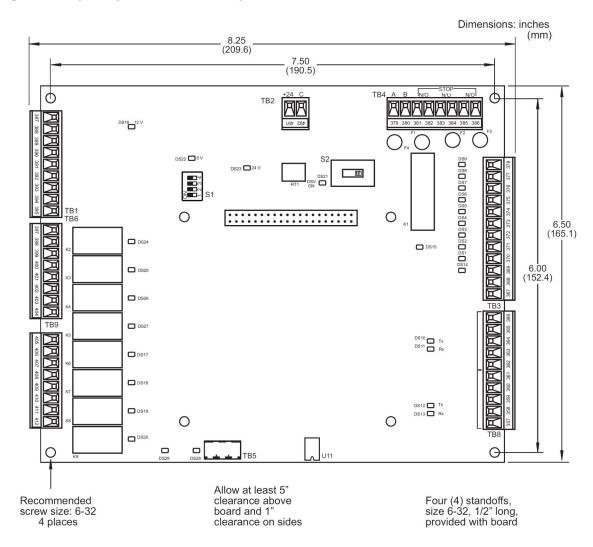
RamPAC Control Board: Mounting Dimensions
